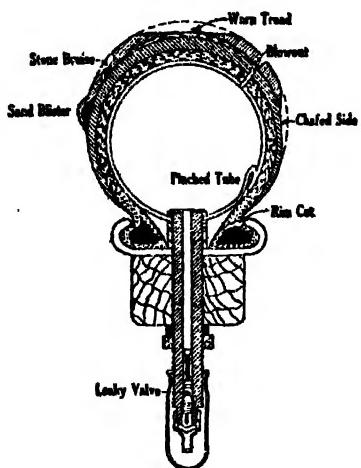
Sectional View of Pneumatic Tire, Showing the Defective Conditions Which Demand Attention.
